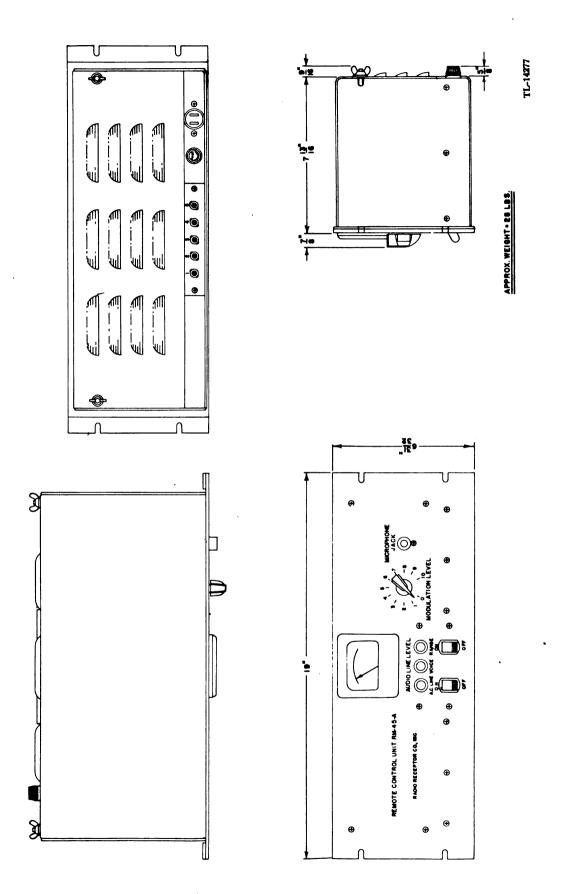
Remote Control Unit RM-45-A, outline drawing.
